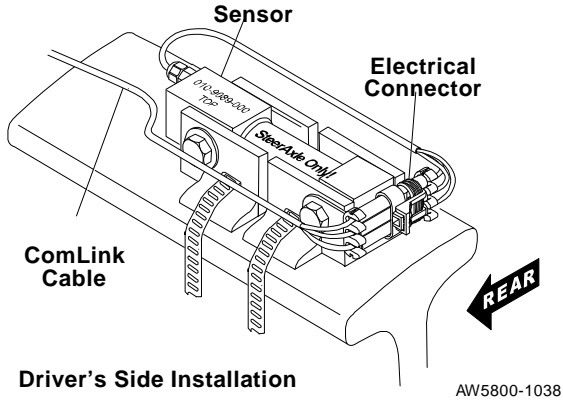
Placing the ComLink Cable for a Driver's Side Hookup
